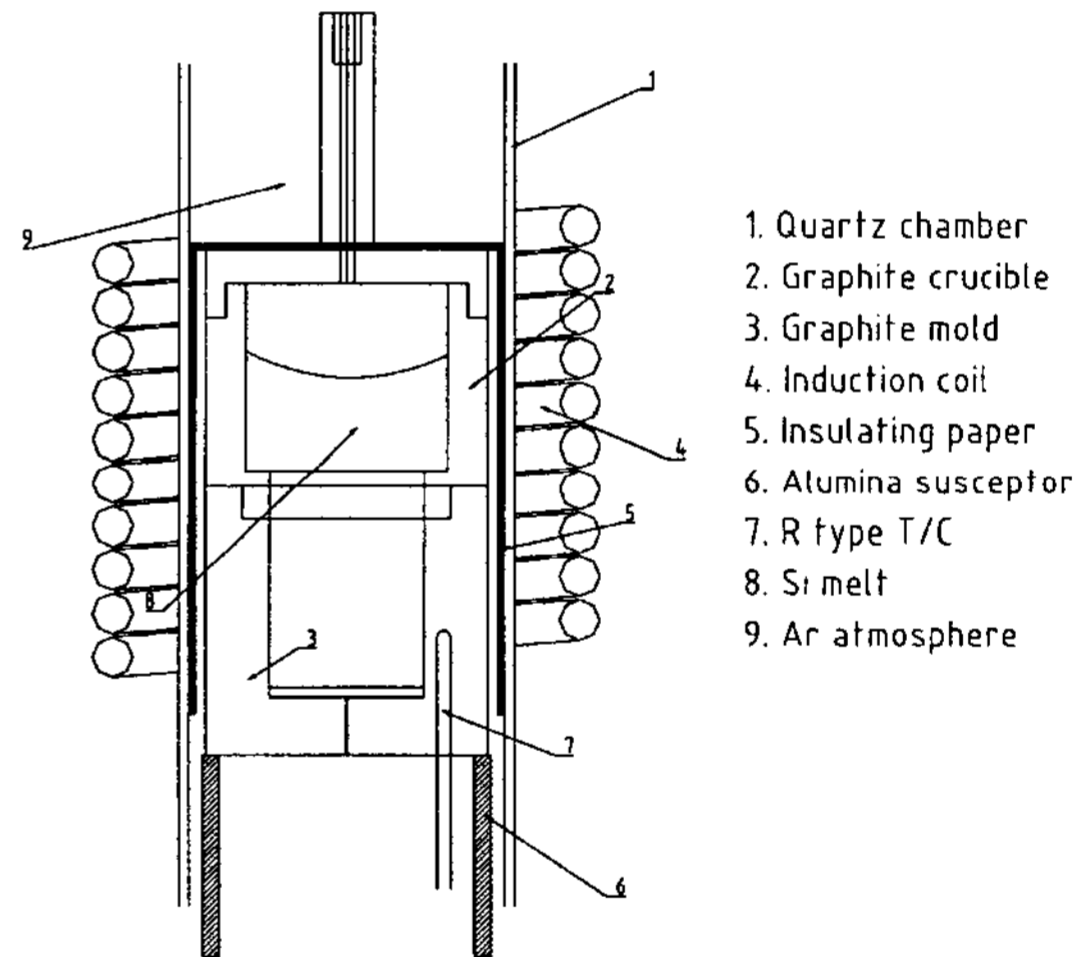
Modified mold and crucible. Si melt was poured from the upper crucible to the bottom mold.
